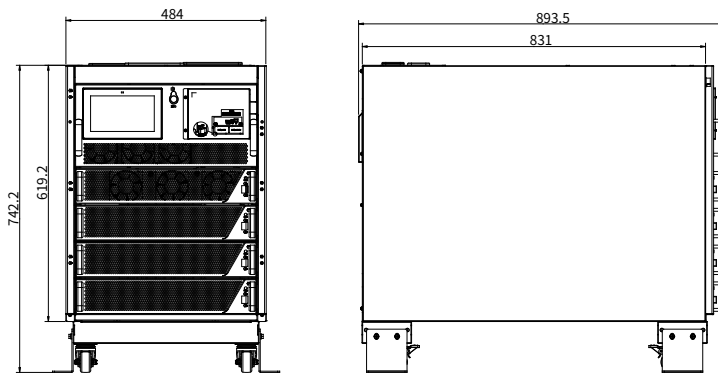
180kVA cabinet dimensions (without wiring cover)
